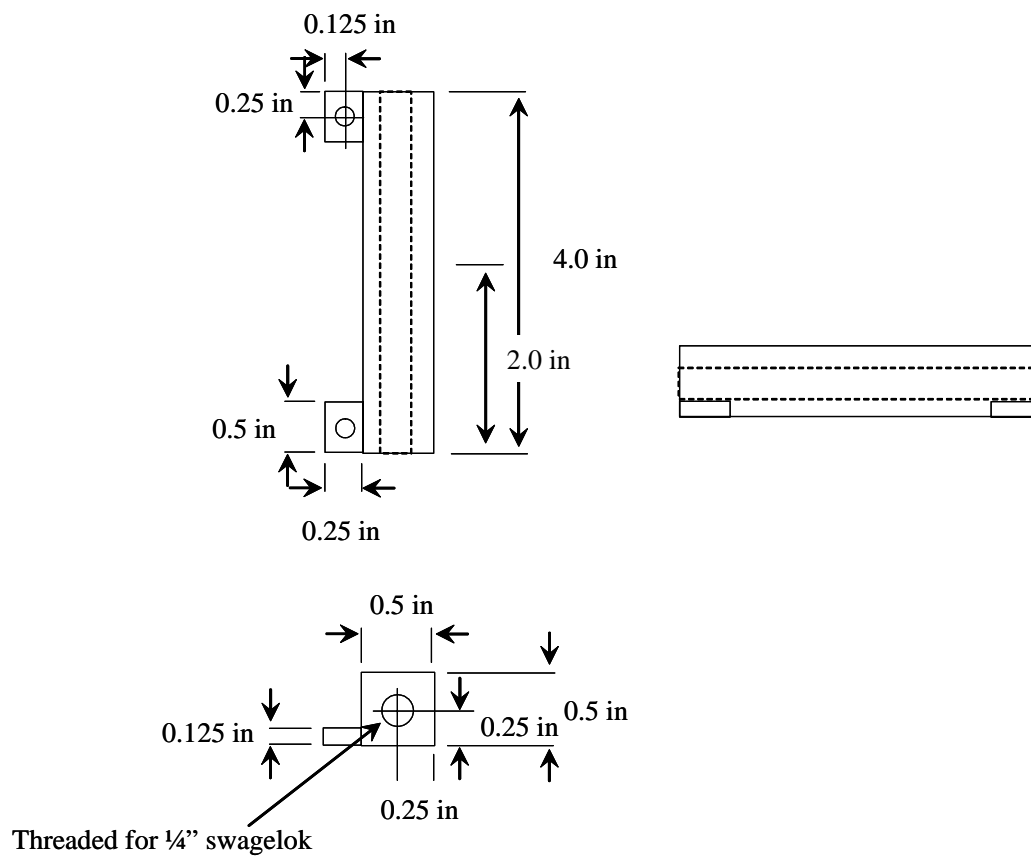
Technical drawing of the cooling bar. The bar has been reamed to 1/4" ID and threaded for 1/8" NPT fittings.
